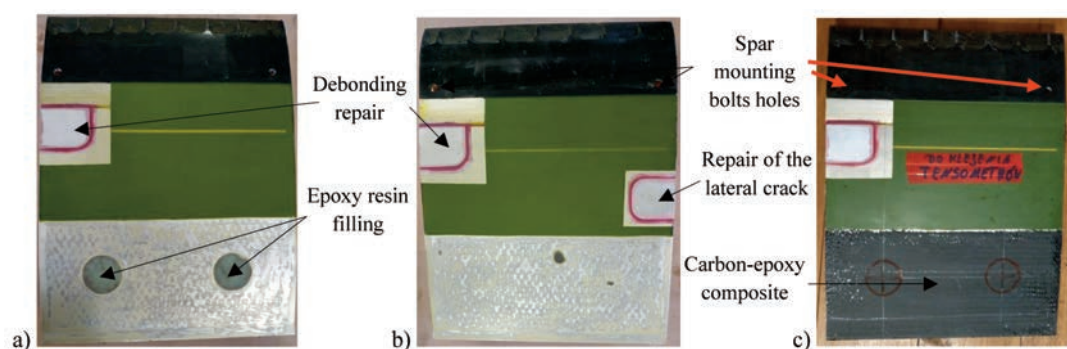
Testing sample, in the form of a single rotor blades section, after repairs: a) lower side, b) upper side, c) section with carbon-epoxy reinforcement.
